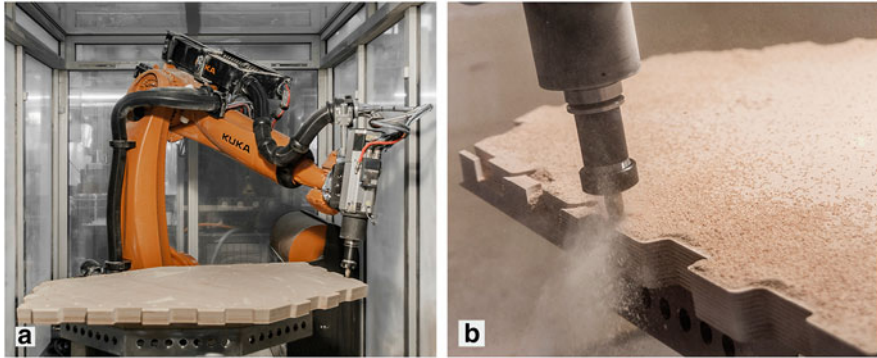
(a) Robotic fabrication setup for milling a plywood plate. (b) Close-up of the milling process
